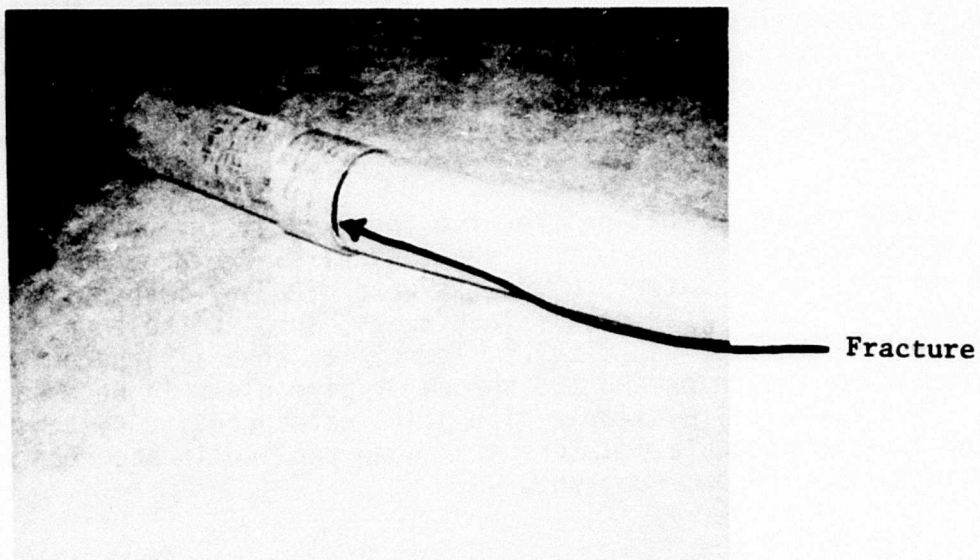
Bottom view of taper-tapped coupling sample after lateral-stress test--showing conduit wall fracture.
